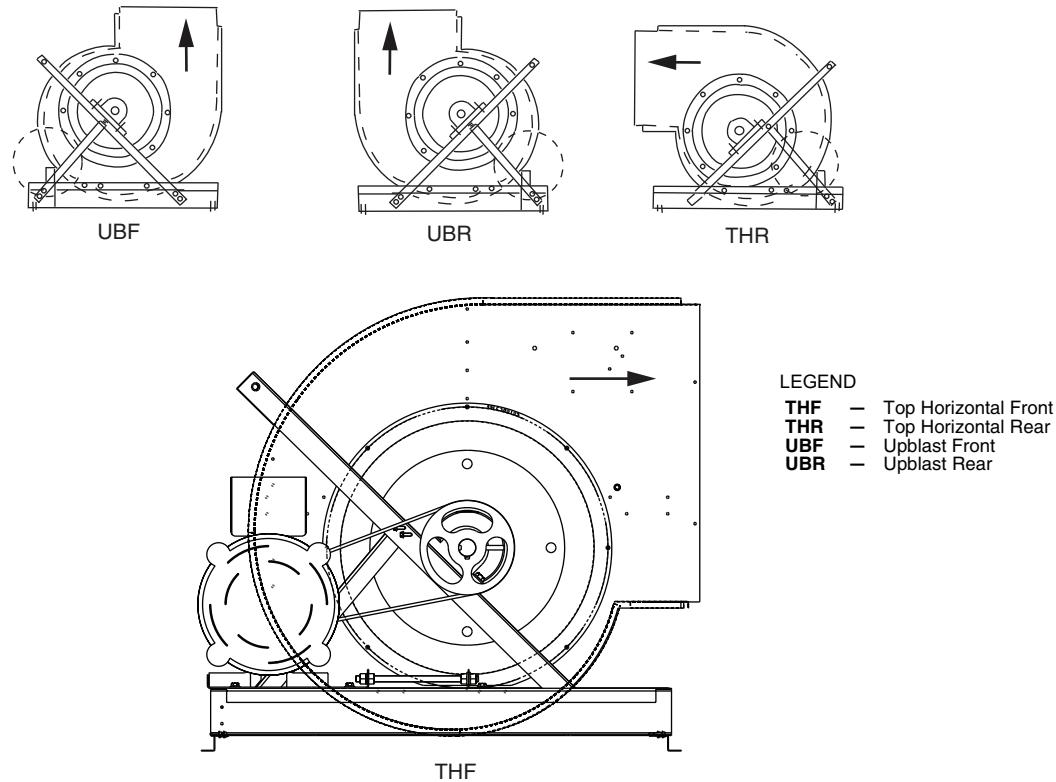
Fan Discharge Positions, Sizes 21 and 25
